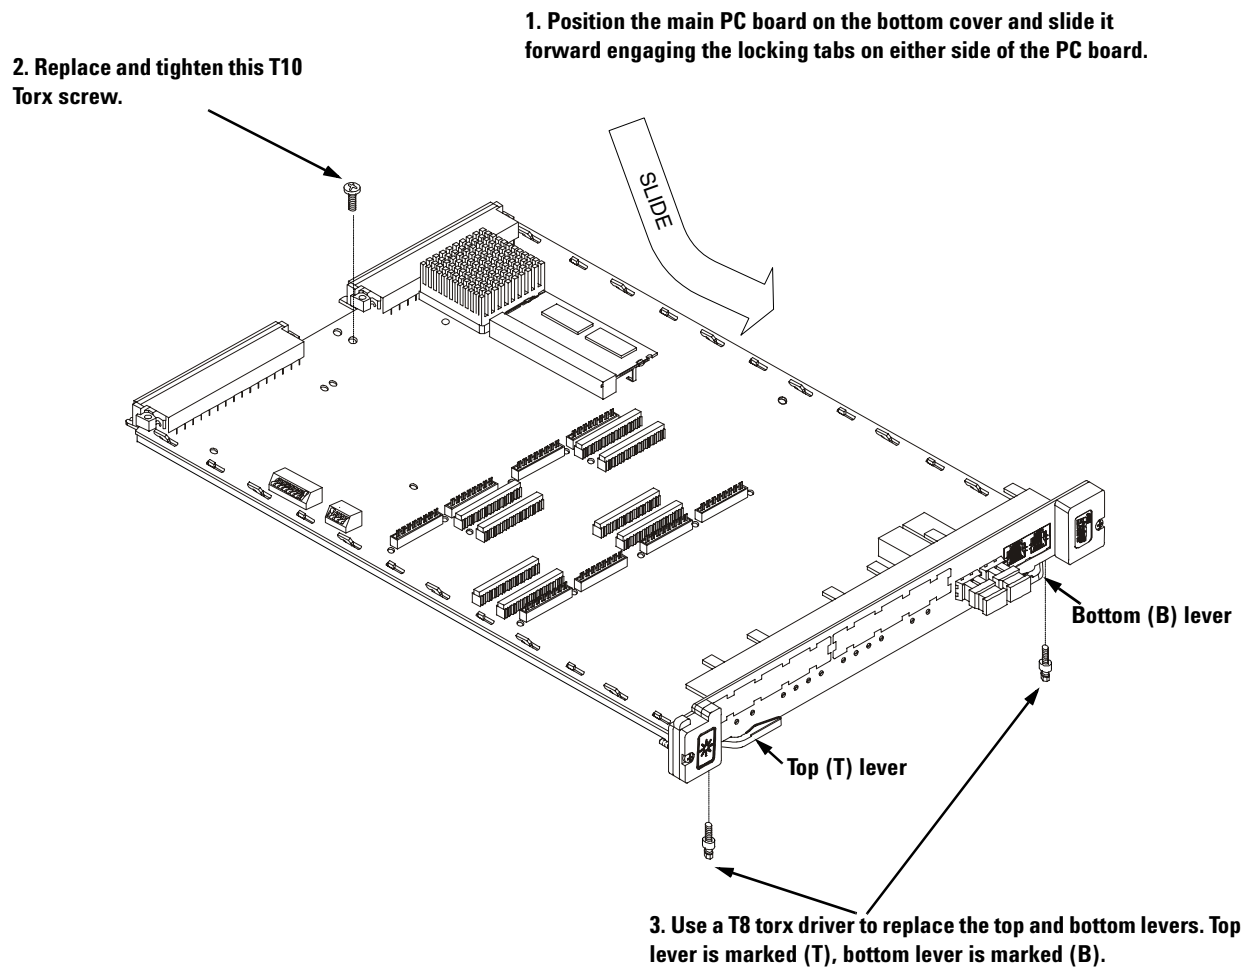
Reassembling the Main PC Board into the Bottom Cover
